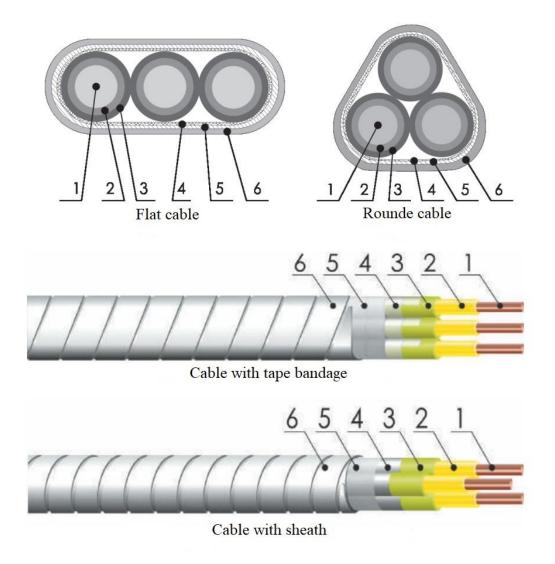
Schematic drawings of the cross-section of cables and the form of structural elements: 1) conductor; 2) the first layer of insulation; 3) the second layer of insulation; 4) bedding; 5) tape bandage or sheath: 6) armour Table A.3. shows cable brands manufactured in the Russian Federation
